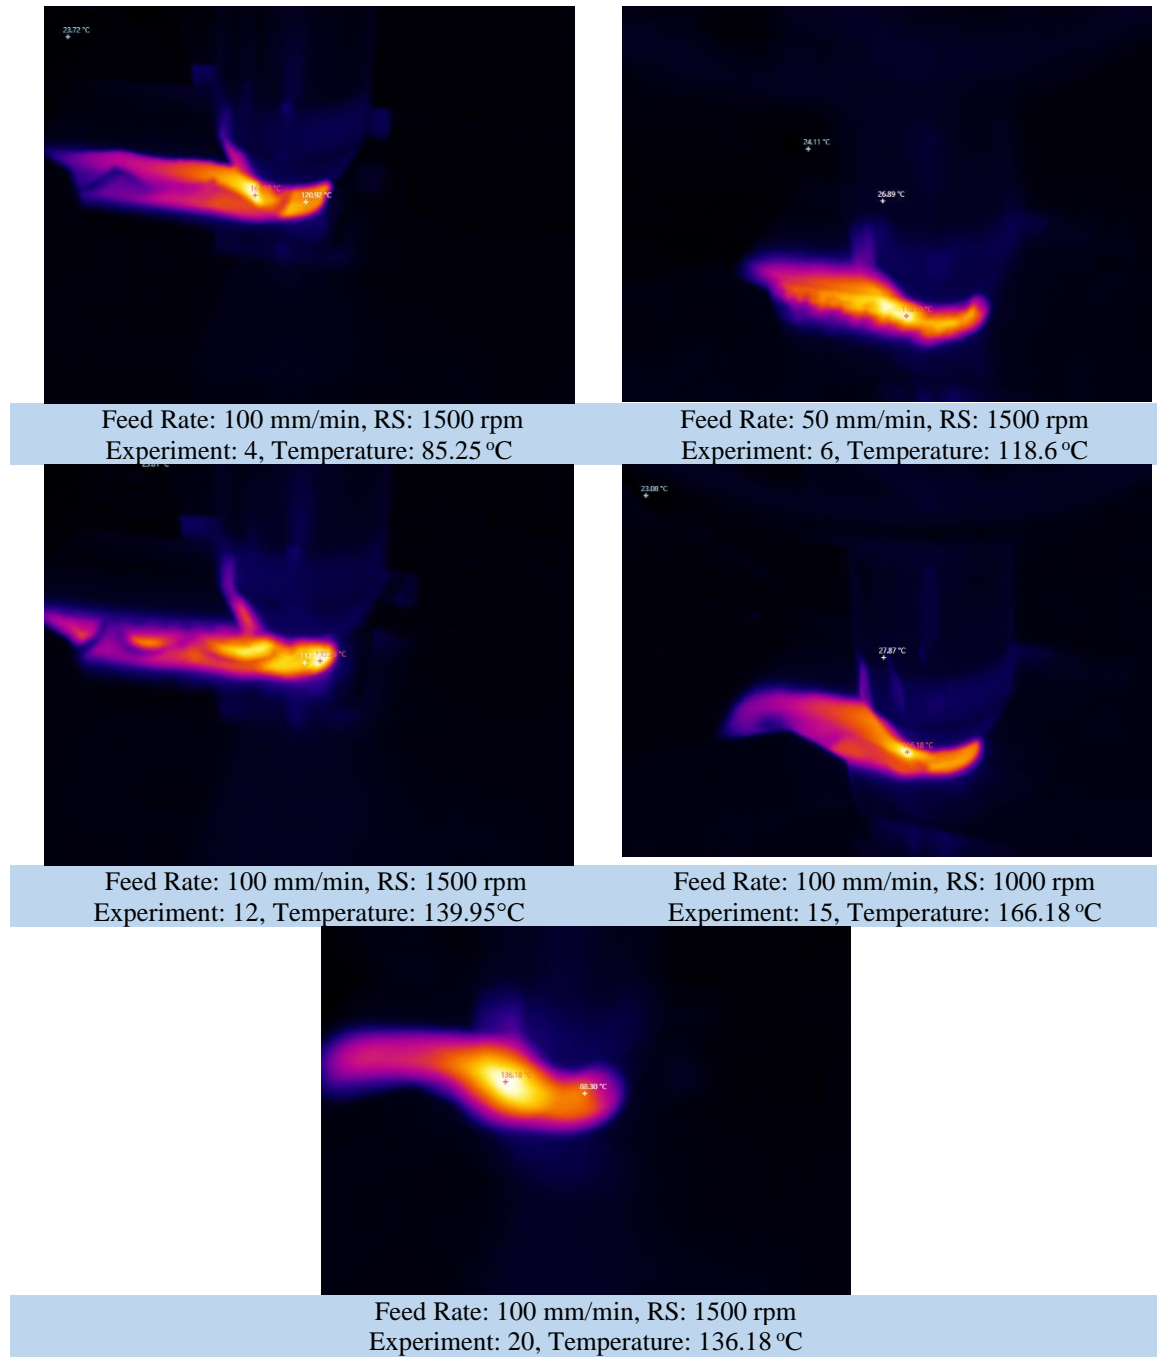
Thermal imaging of highest welding strength (En yüksek kaynak mukavemetine sahip deneylerden termal görüntüler)
